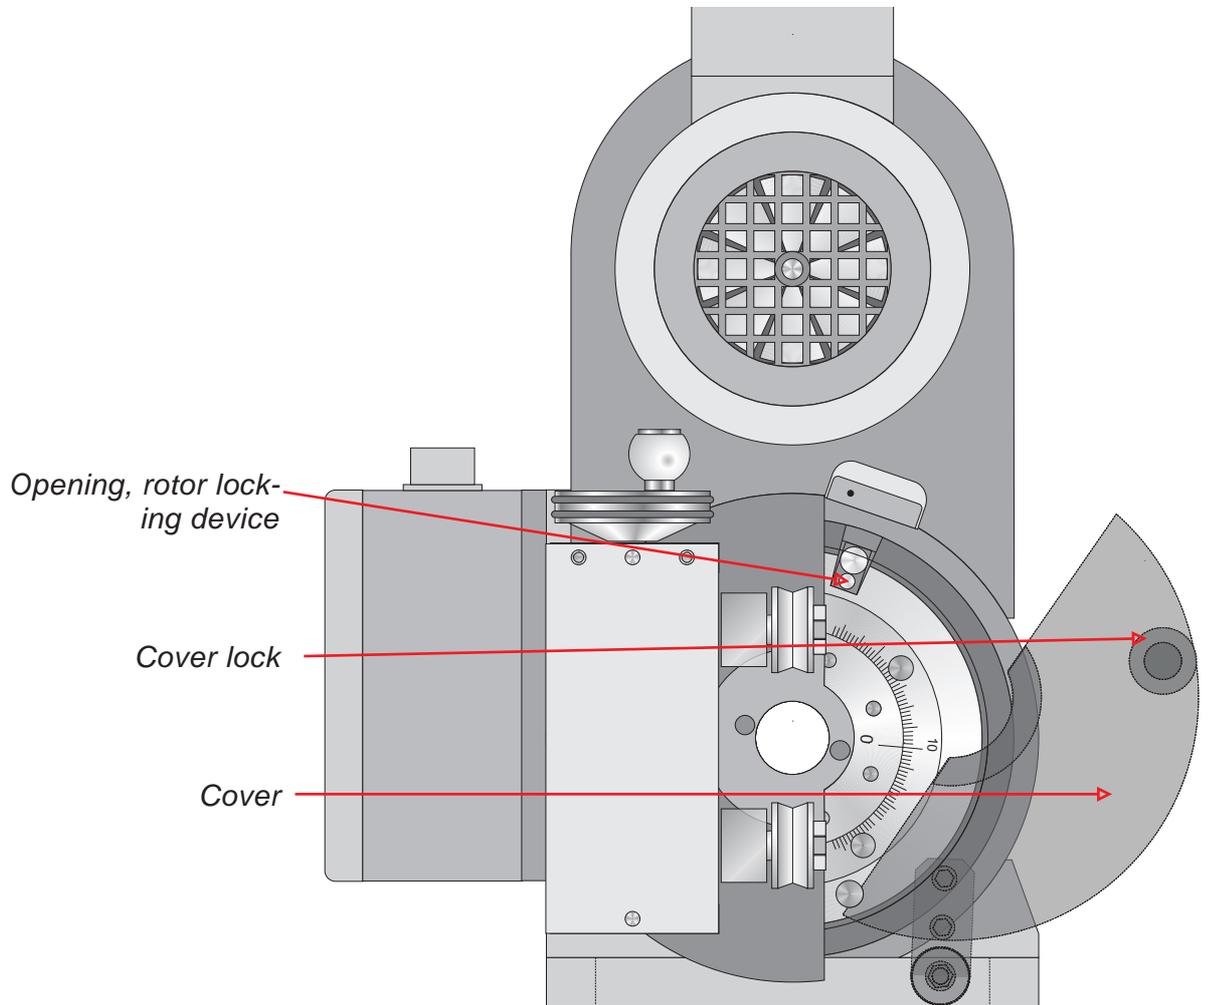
/11 Adjustment side, rotor cover and rotor locking device
